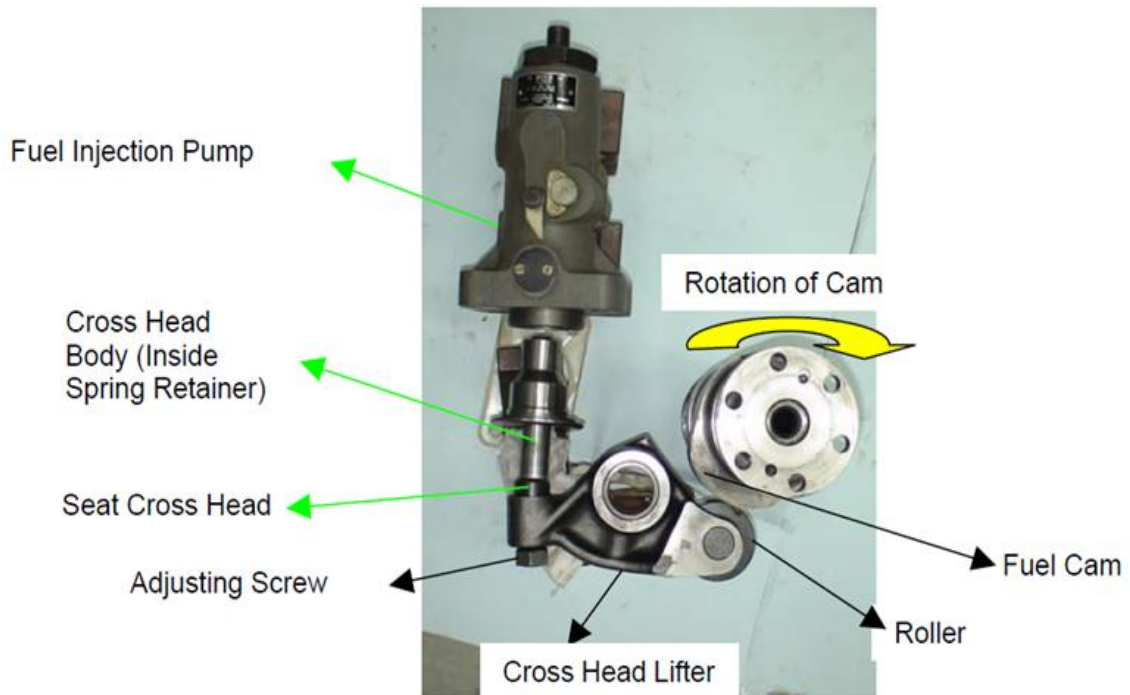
Arrangement showing Fuel Injection by Camshaft ⁽¹¹⁾
